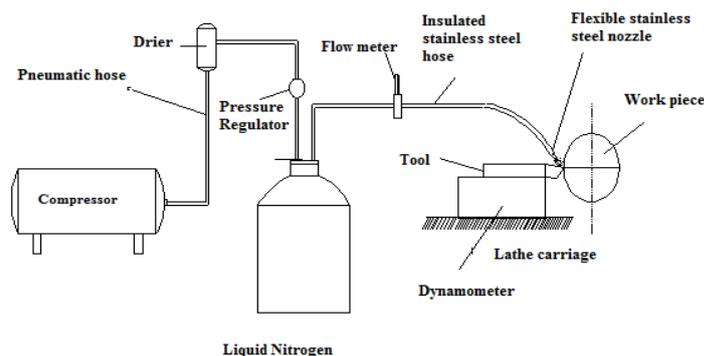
diagram of Experimental set up for cryogenic LN2 machining
